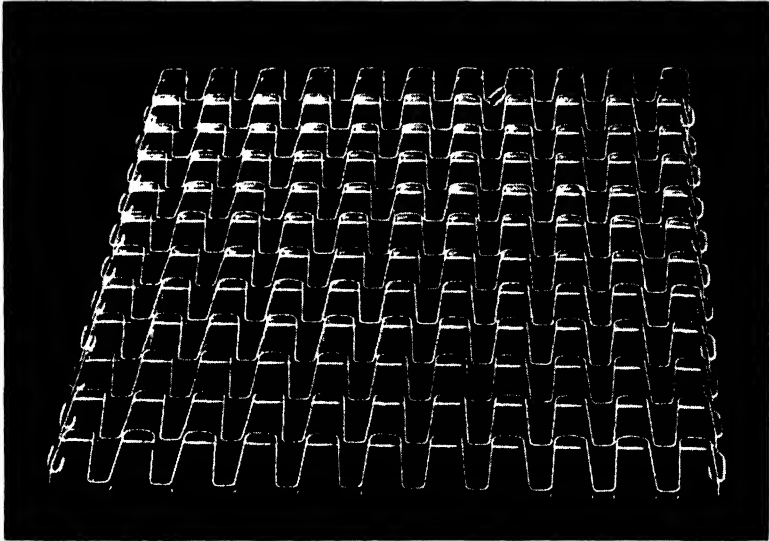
Conveyor Belt of Flat Steel Strips with Hinge Pins.
